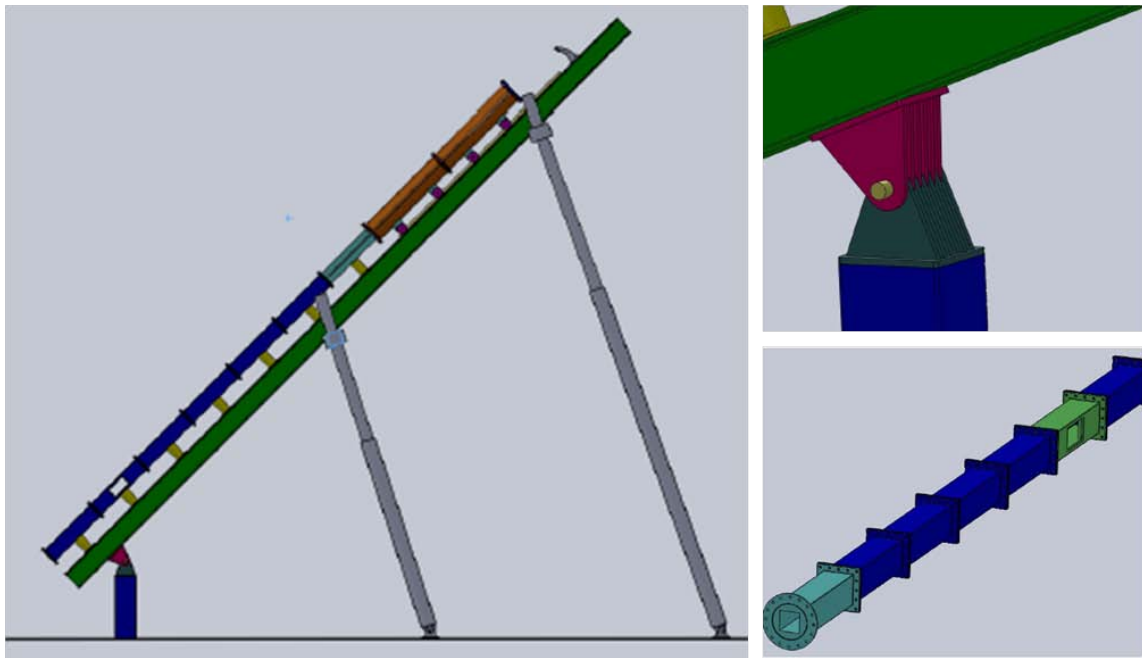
Solid works model of the initial shock tube design created by Peter Koppenberger. Left: The shock tube at a 45° angle with telescoping supports to hold its position. Right Top: The hinge mechanism. Right Bottom: The tube sections highlighting its modular construction method.
